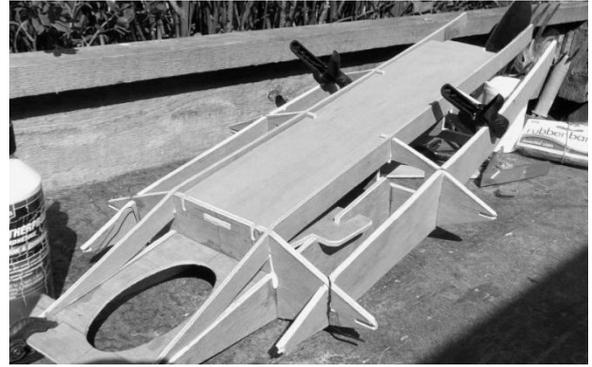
, indicates the assembly is held in position whilst the glue sets, by use of the jig, clamps, elastic bands, and tape.
